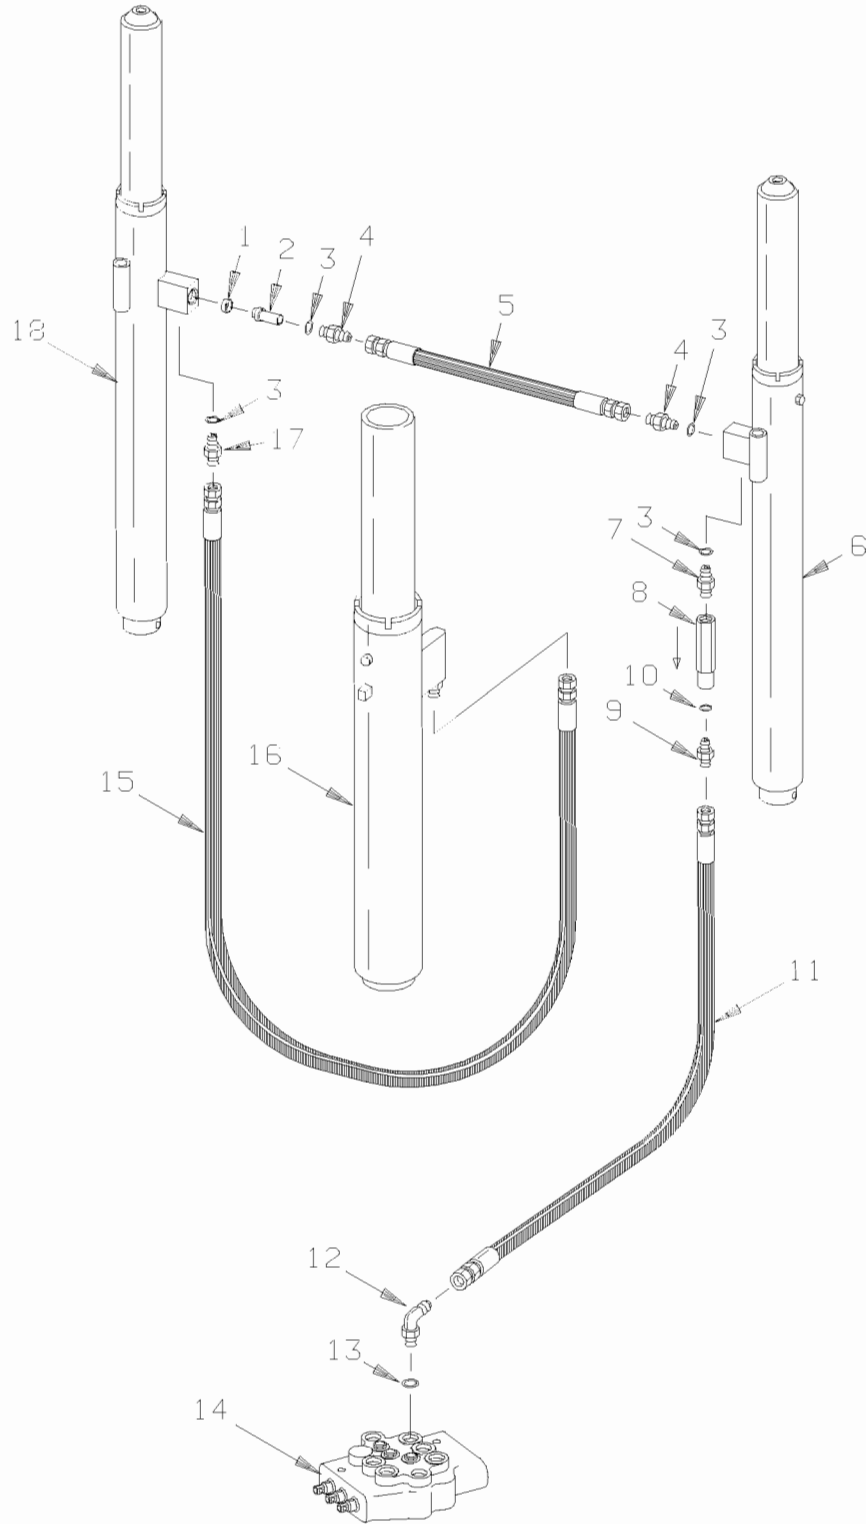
SC-20 DUAL ELBOW SWIVEL ASSEMBLY (25623-00)
